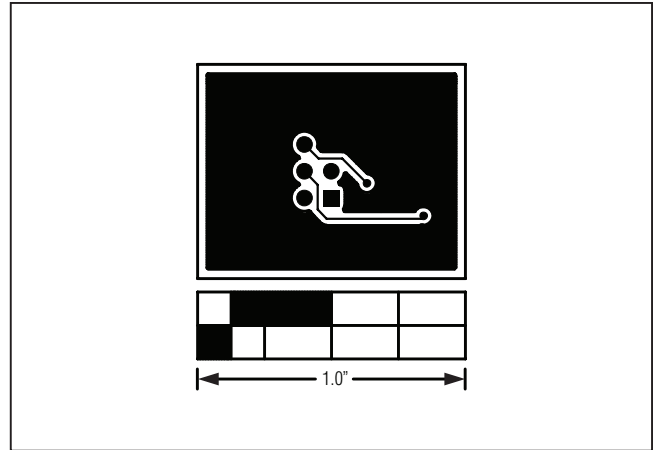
MAX44000 Daughter Board PCB Layout—Bottom
